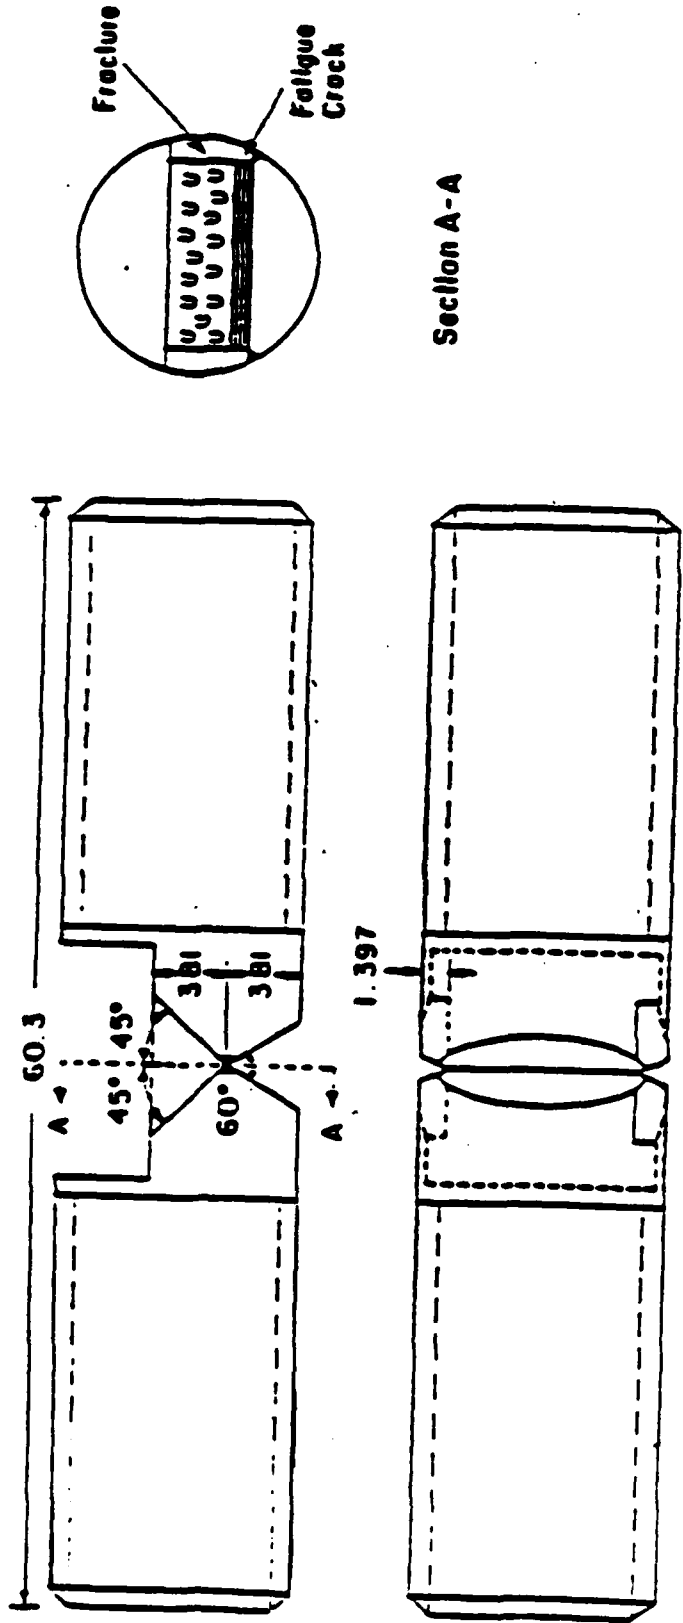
Second machining (after fatigue precracking) for the symmetric specimens; a is the fatigue precrack
